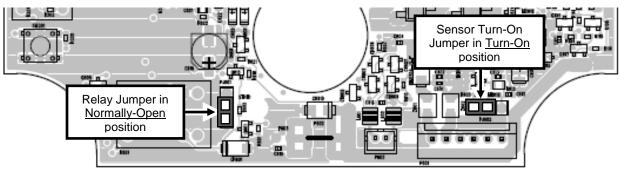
Sensor Turn-On Jumper Shown in Turn-On Position
